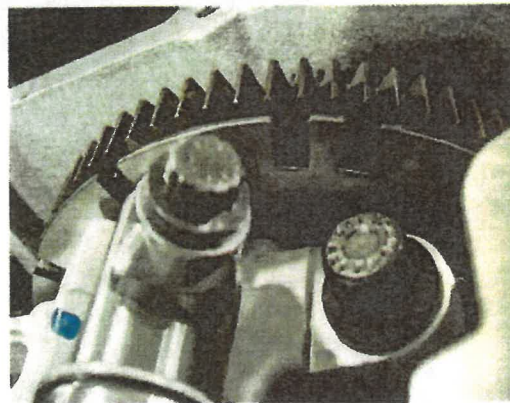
New intake camshaft tone wheel (left) and old tone wheel (right)
